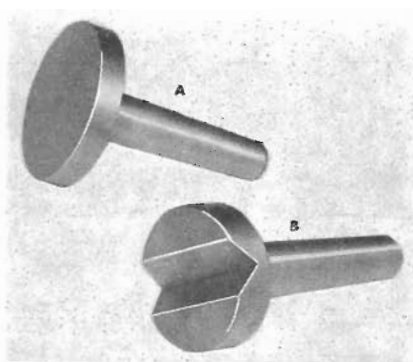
Drill Pad "A" and Crotch Centre "B"
